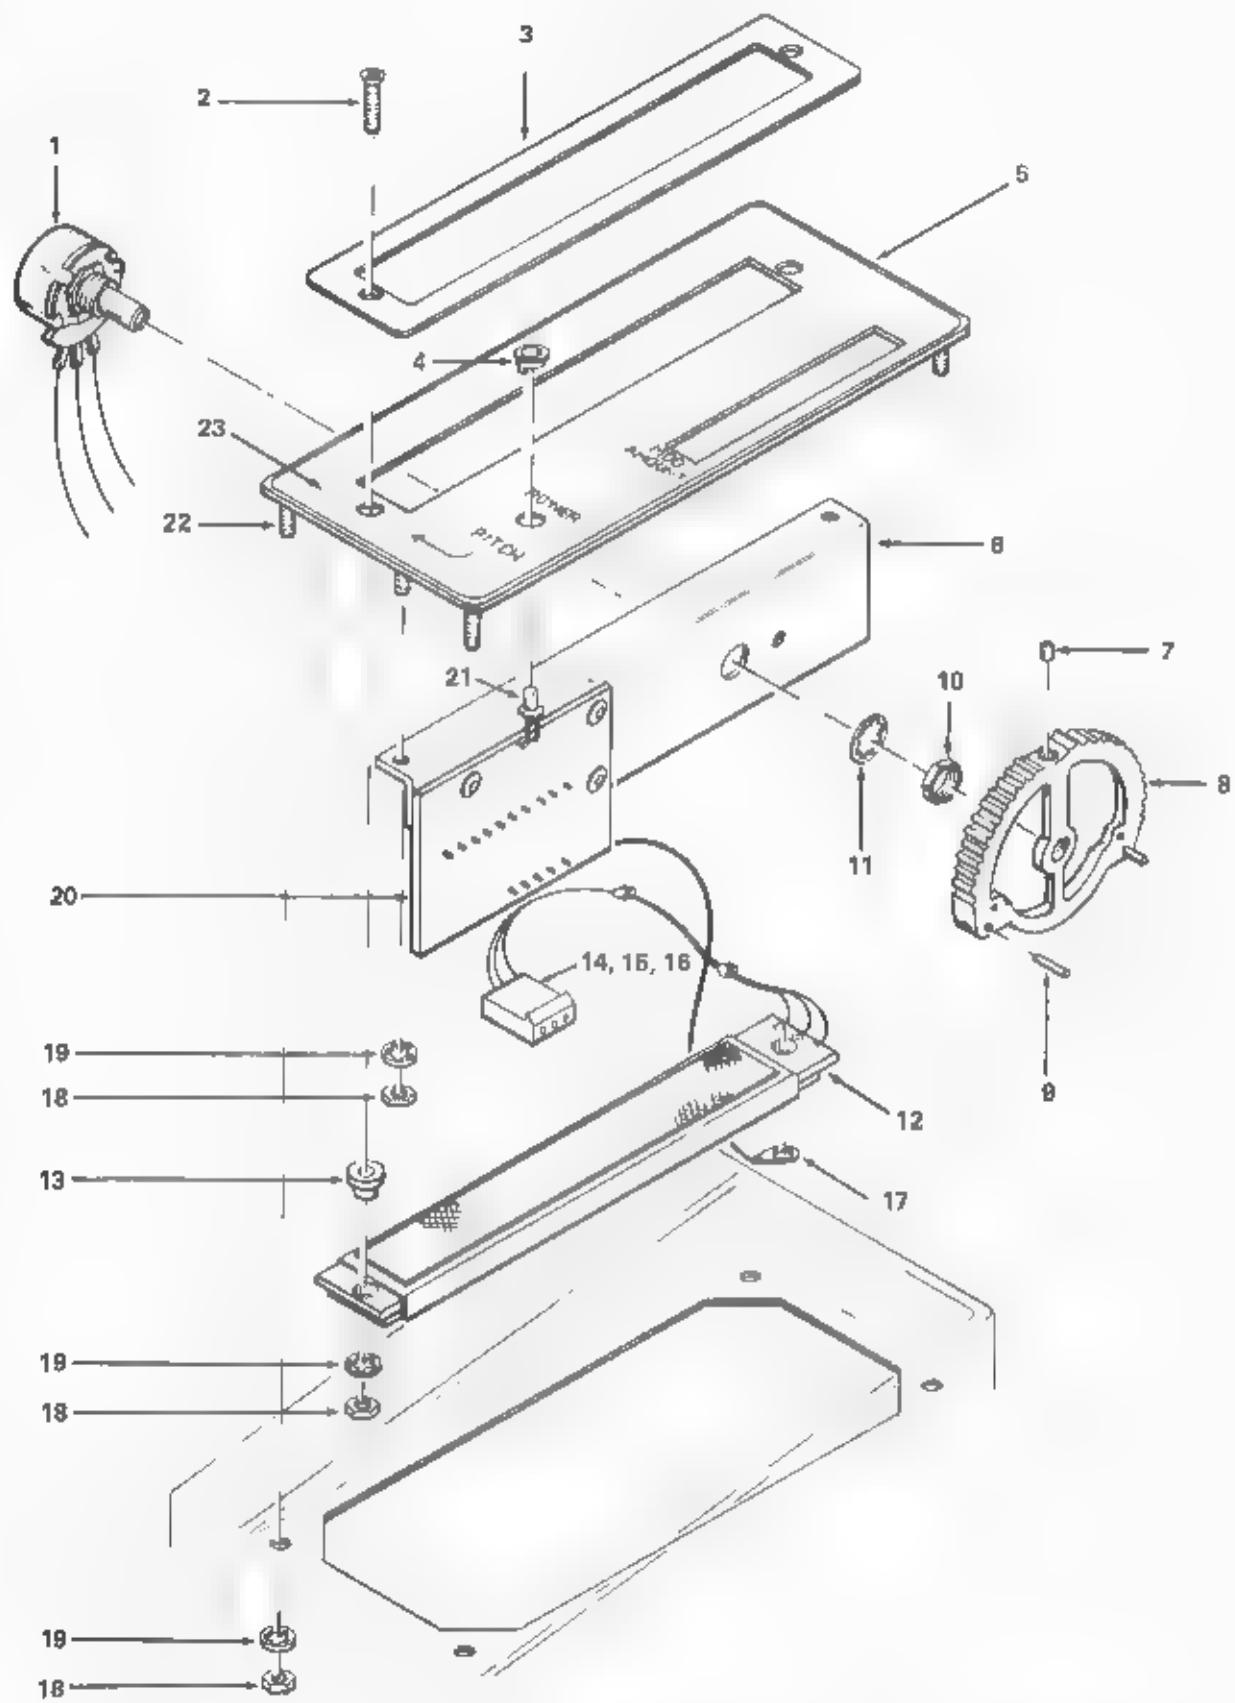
LEFT HAND CONTROLLER ASSEMBLY, PART NO. 997-041463-001
